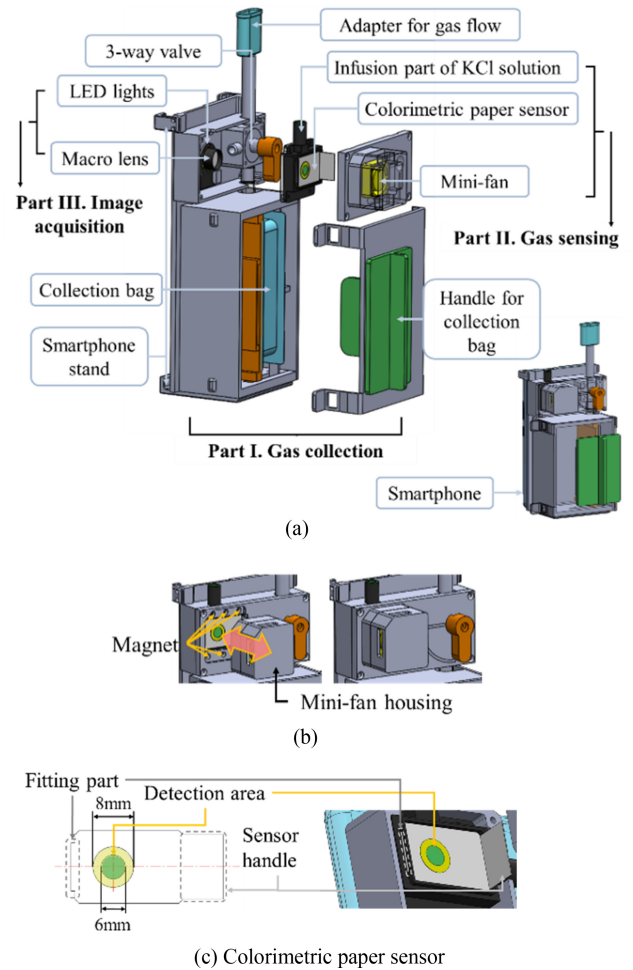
On-site analytical device for hydrogen sulfide; (a) exploded view and part designation, (b) attachment/detachment of sensor cover using magnet, (c) colorimetric paper sensor and its assembly method
